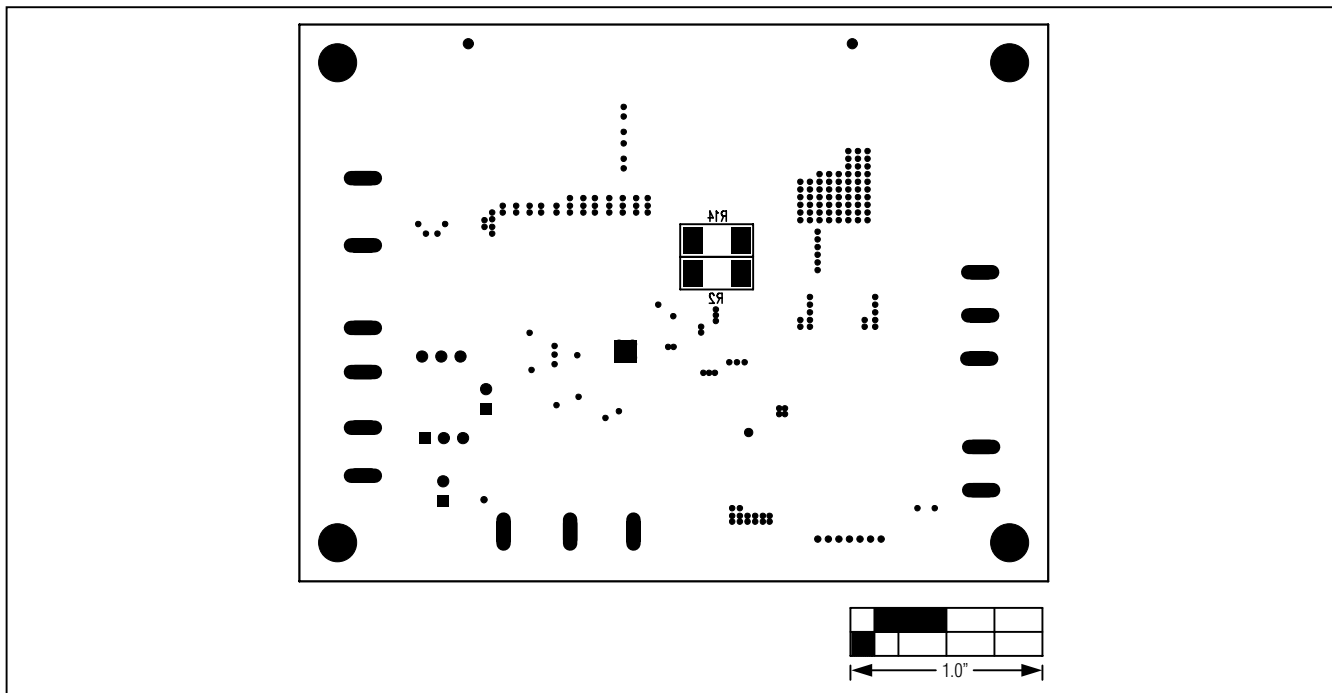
MAX16833 EV Kit Component Placement Guide—Solder Side
